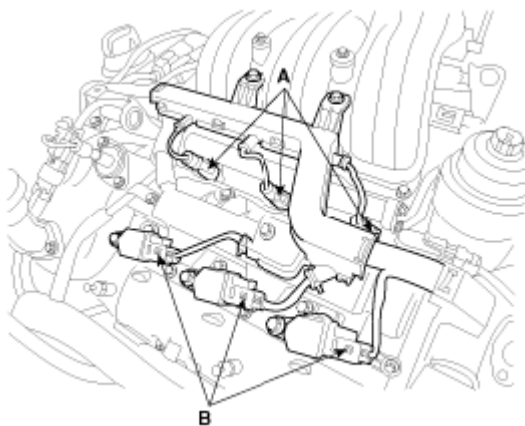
Identifying Connectors For LH Injector & LH Ignition Coil
